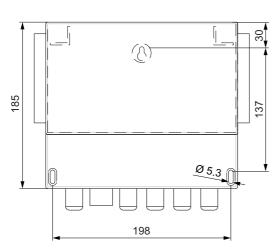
Dimensions of CU 382 control unit for wall-mounting, back (in mm)
